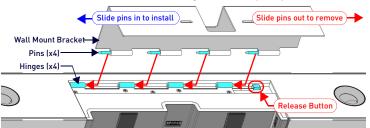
ACV-5100 BOTTOM VIEW - REMOVING THE BRACKET
